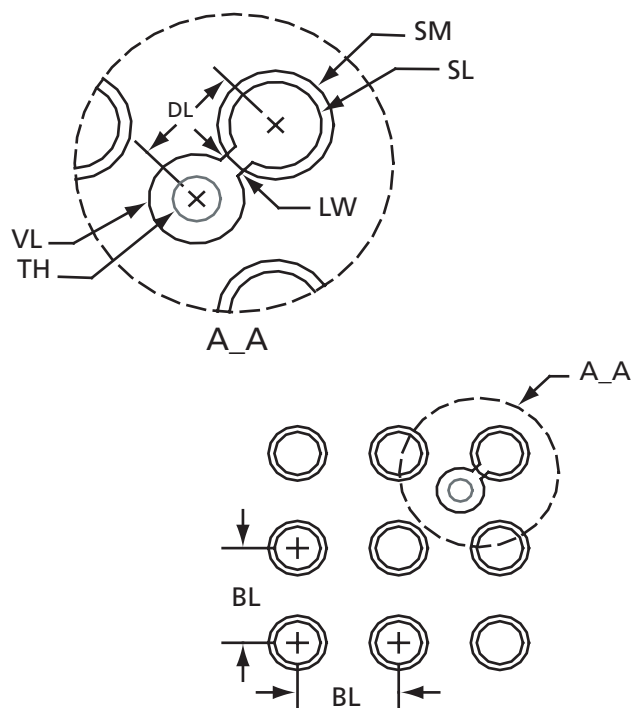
Suggested Board Layout of Soldered Pads for BGA Packages
